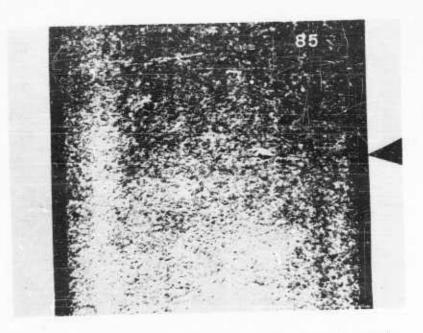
FAILURE IN SPECIMEN NO. 85
